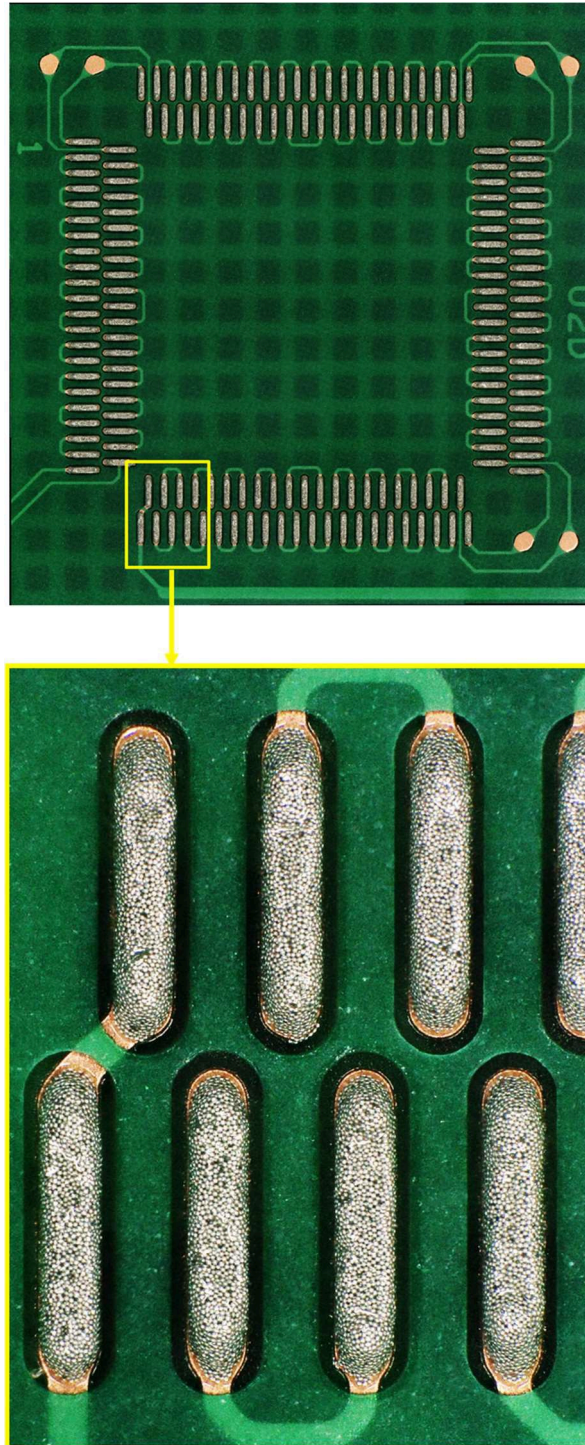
Example of the 172 HDQFP PCB footprint recommended with solder paste printing
